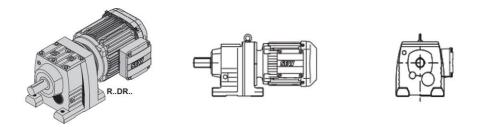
Perspective, frontal and side views of the R..DR.. helical gearmotor in footmounted design.
